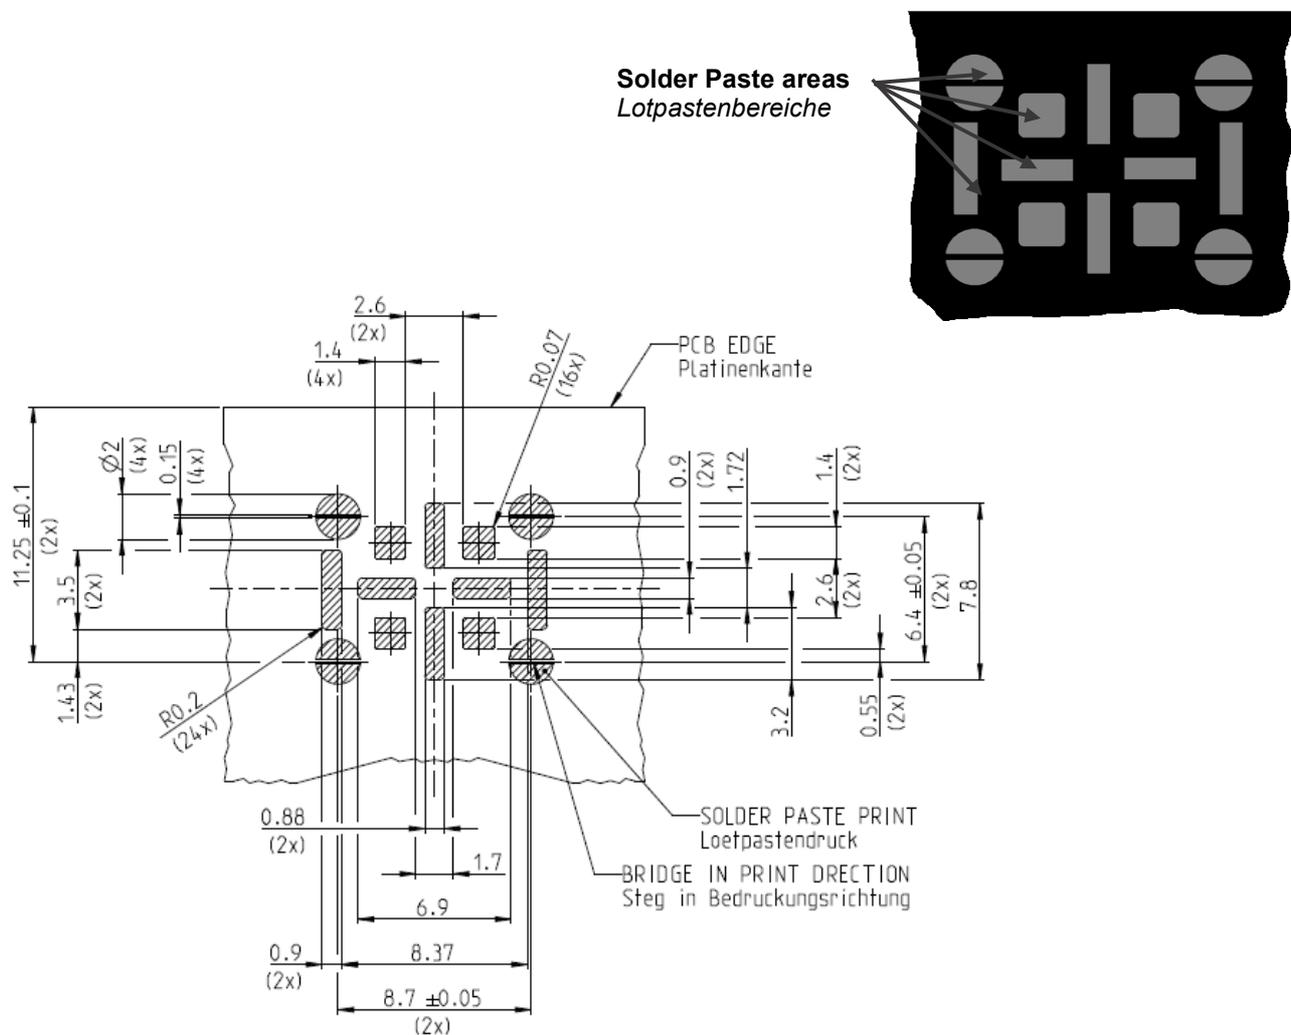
Solder paste layout for MATE-AX header 2304168
